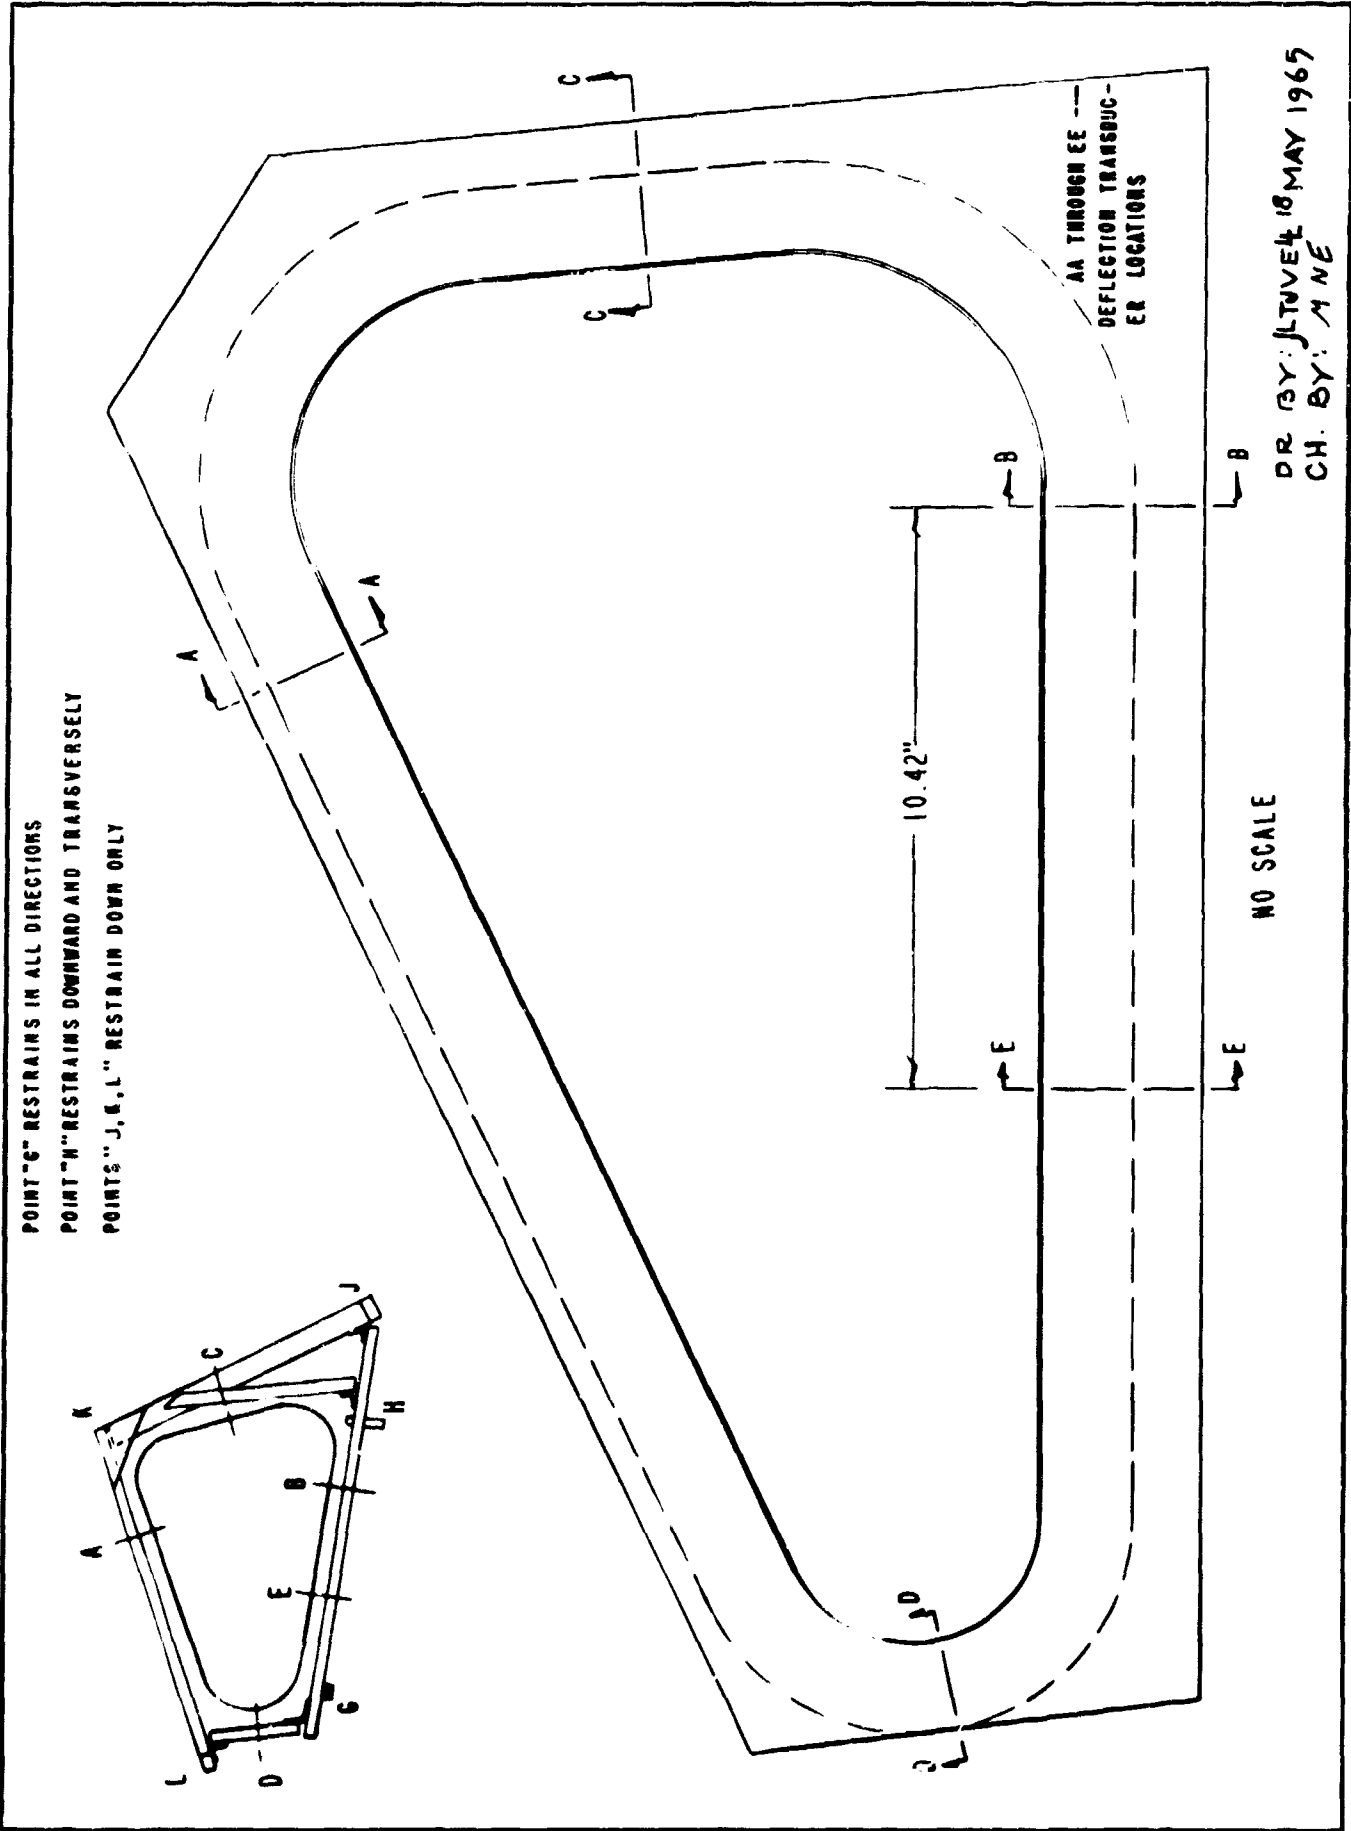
Schematic of X-20 Window Section Locations and Tie-Down Points
